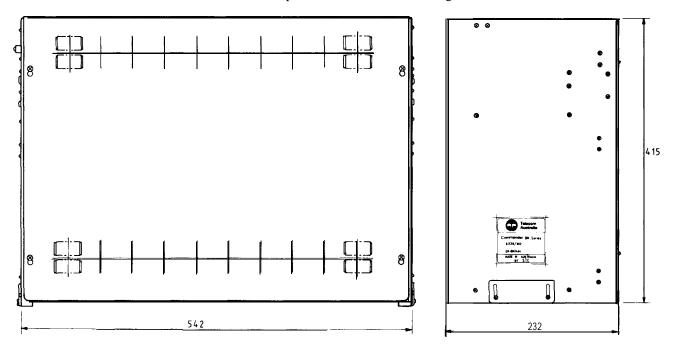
(a) BN-2464 EXPANSION RACK CABINET DIMENSIONS
